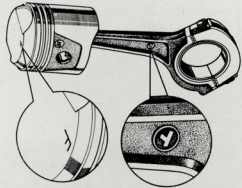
Correct Piston & Y2342 Connecting Rod Position
